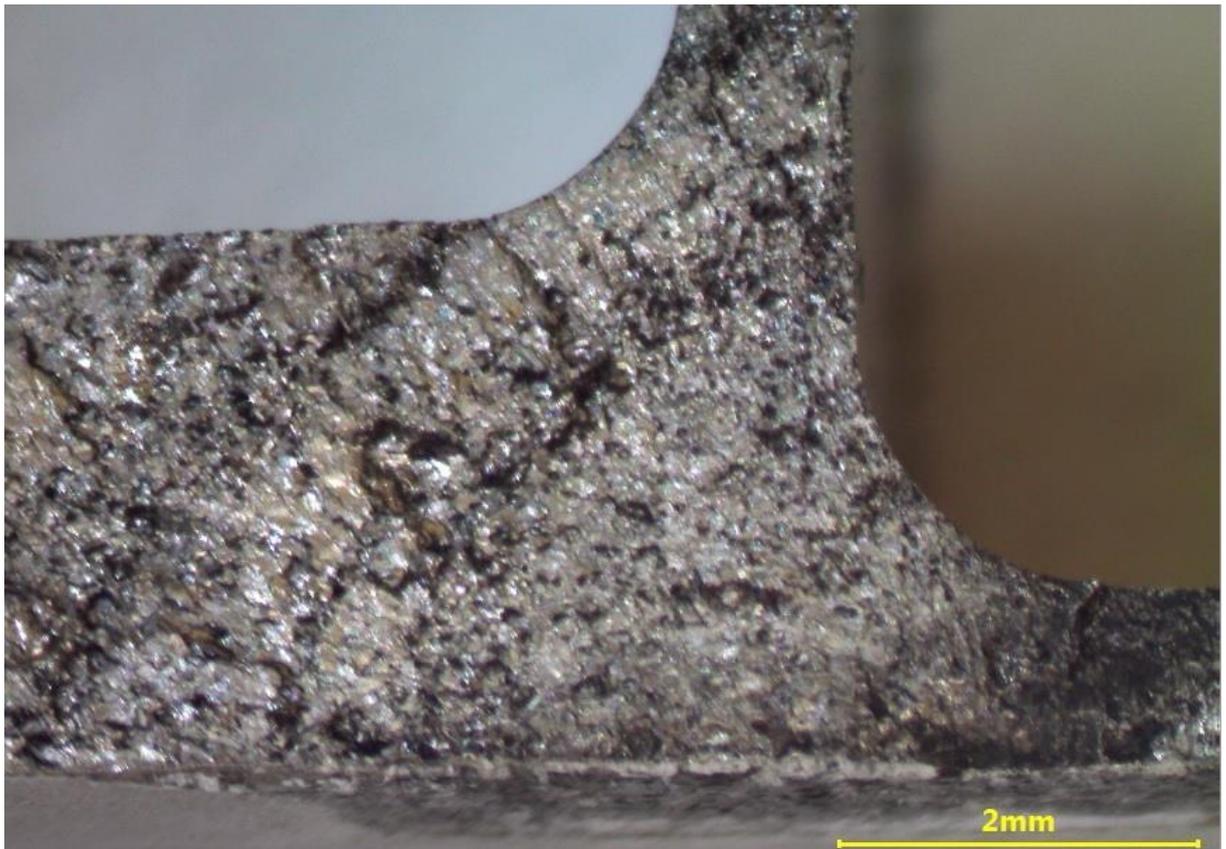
Detail from fig. 19 - lower area. Visible place of the fatigue crack [source: Silesian University of Technology]
